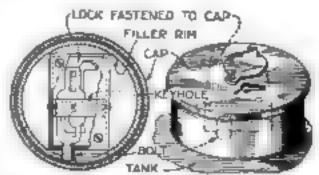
This fuel tests cap lock is an ordinary small door lock riveted or acrewed in place under cap.
